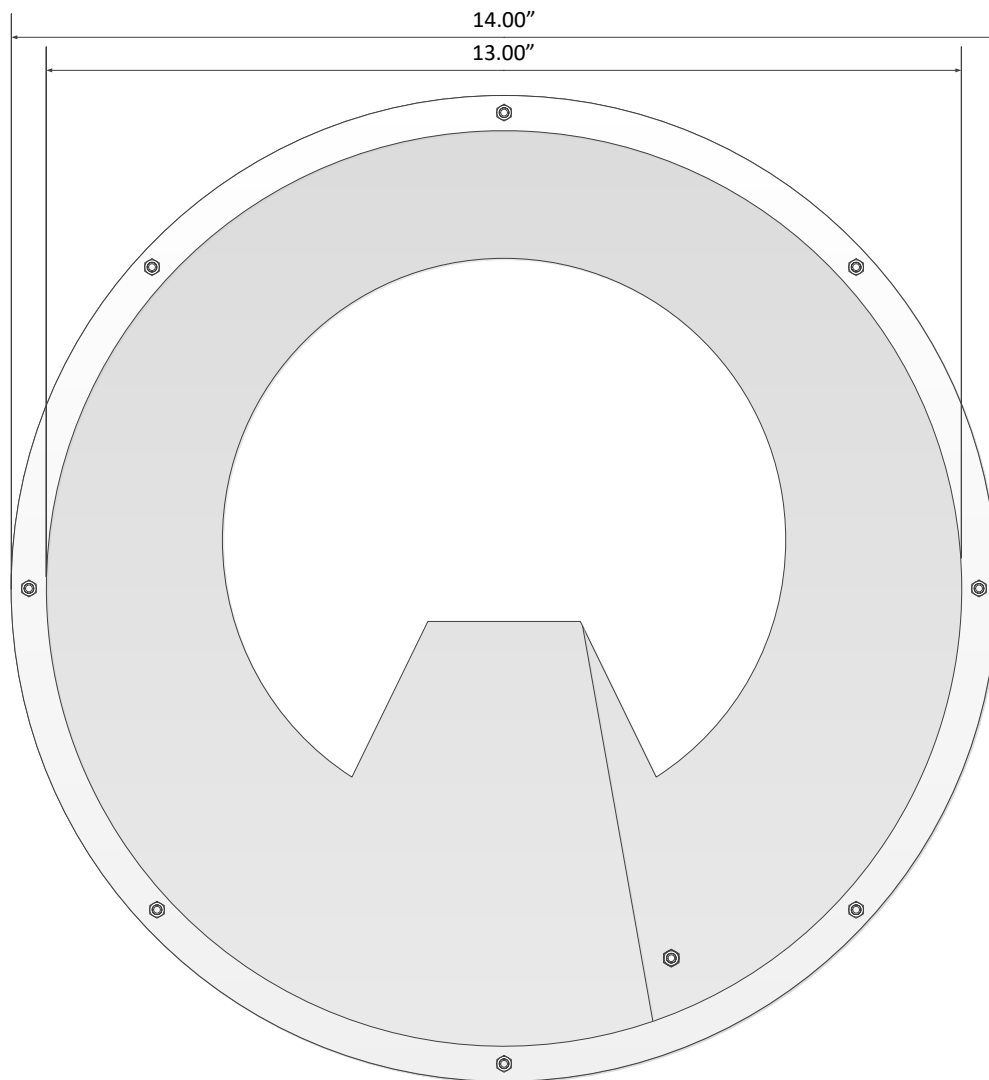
Upper radiation shield drawing bottom ring, bottom view
